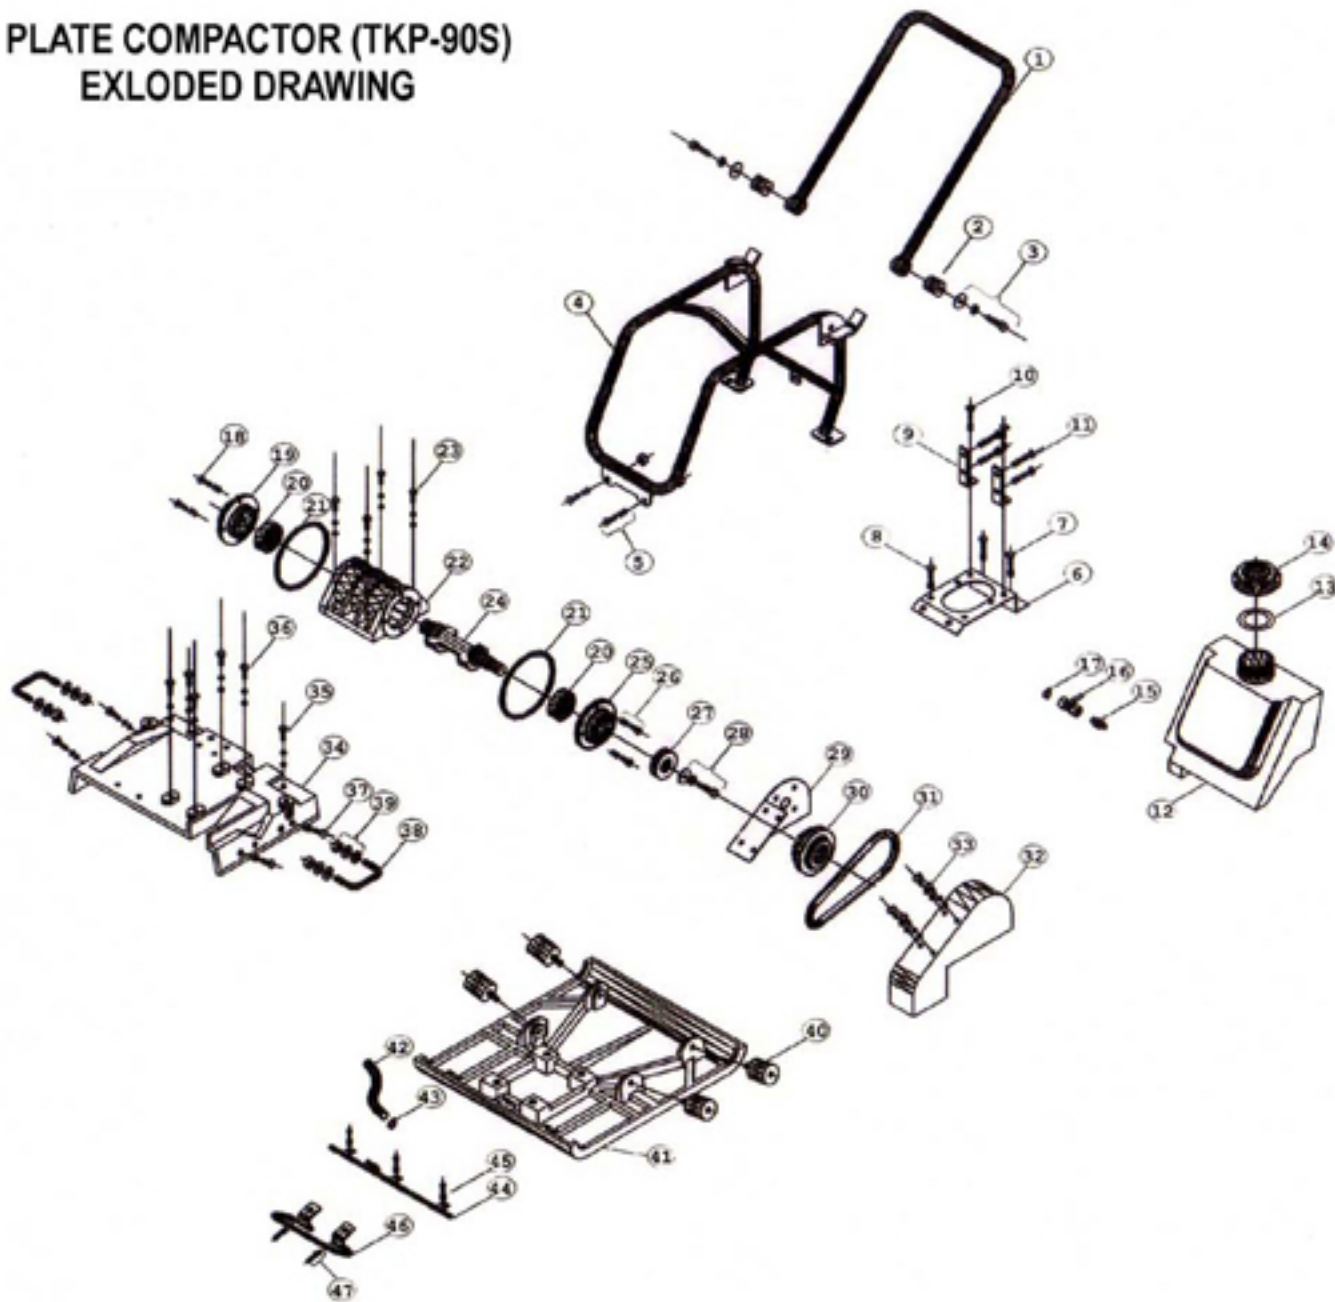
PLATE COMPACTOR (TKP-90S) EXPLODED DRAWING
